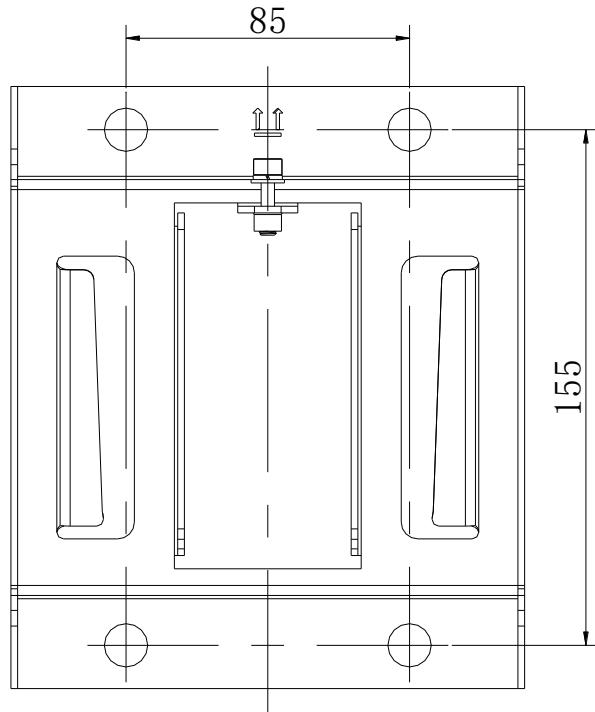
Wall-mounting Drilling Dimension Diagram
